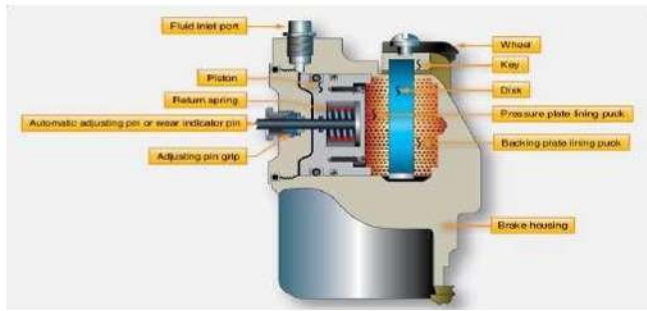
A cross-sectional view of a Goodyear single-disc brake caliper illustrates the adjusting pin assembly that doubles as a wear indicator.
